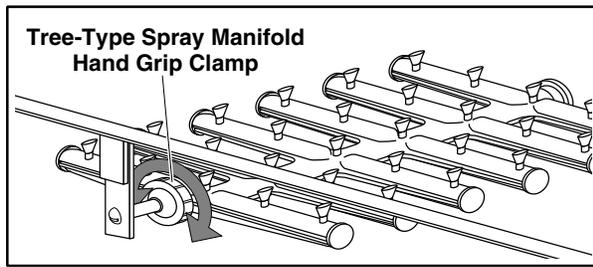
Tree-Type Spray Manifold Hand Grip Clamp
